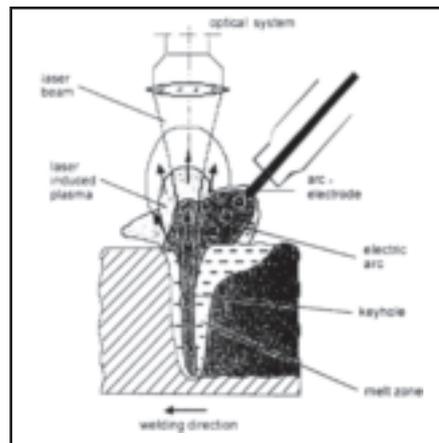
Laser-GMAW welding process (Ref. 17).
